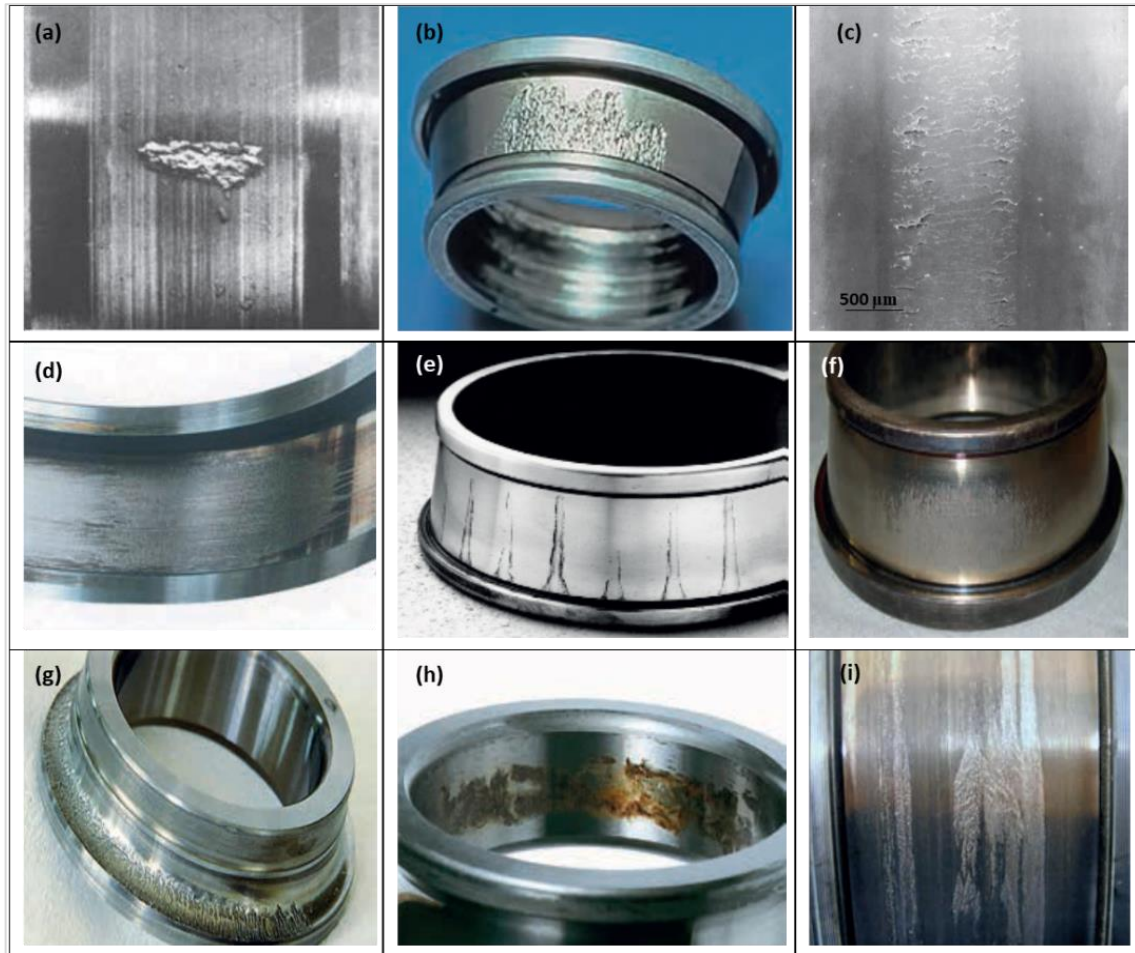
Examples of bearing inner race failures [148]. (a) Spalling in early-stage; (b) Spalling in advanced stage; (c) micro-spalls; (d) Smearing; (e) contact corrosion; (f) surface-initiated micro-spalls; (g) surface-initiated spalling; (h) fretting; (i) smearing and skidding.
